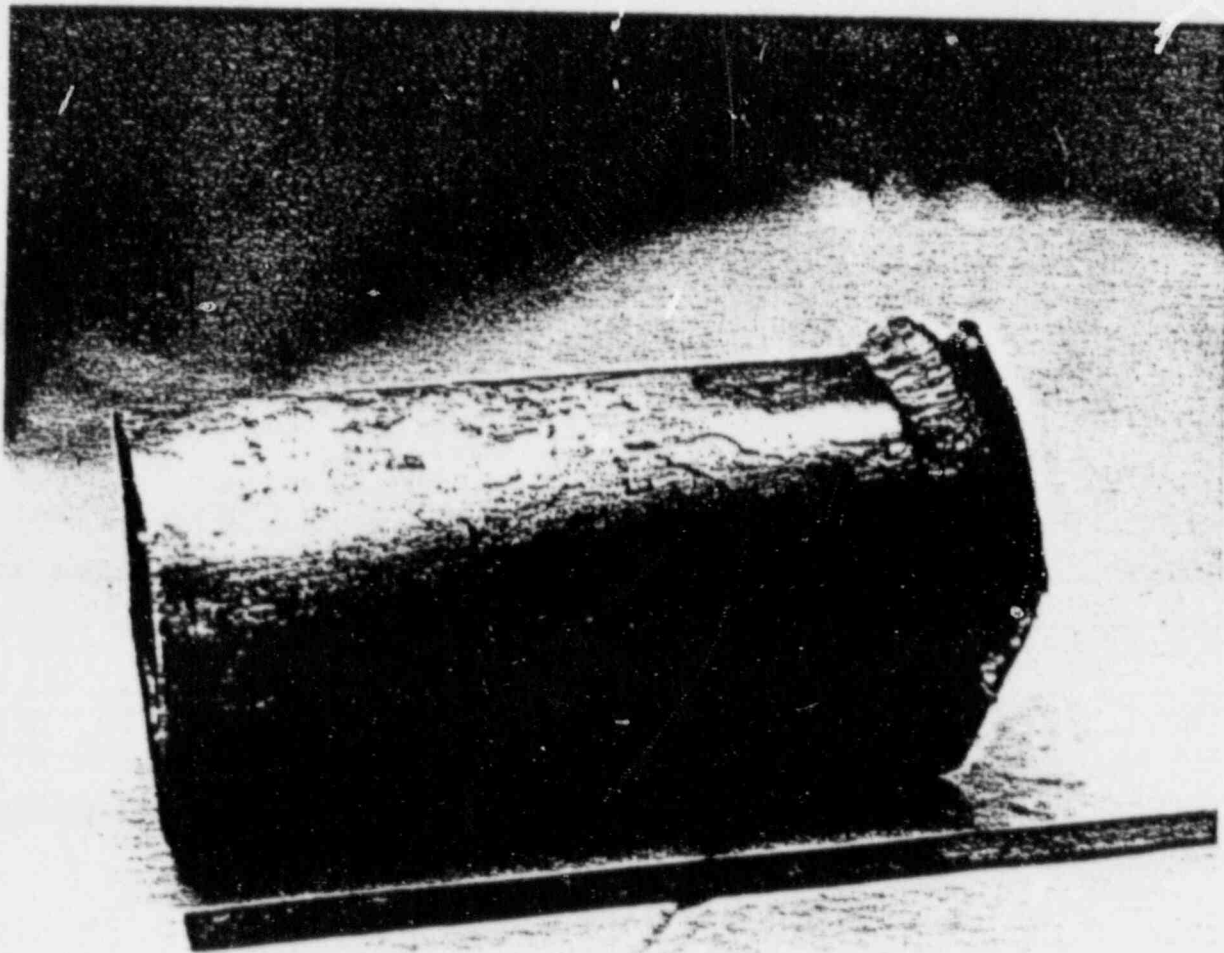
Side view of as received specimen showing visible crack at fusion line on OD surface and Serial Number 469167.
